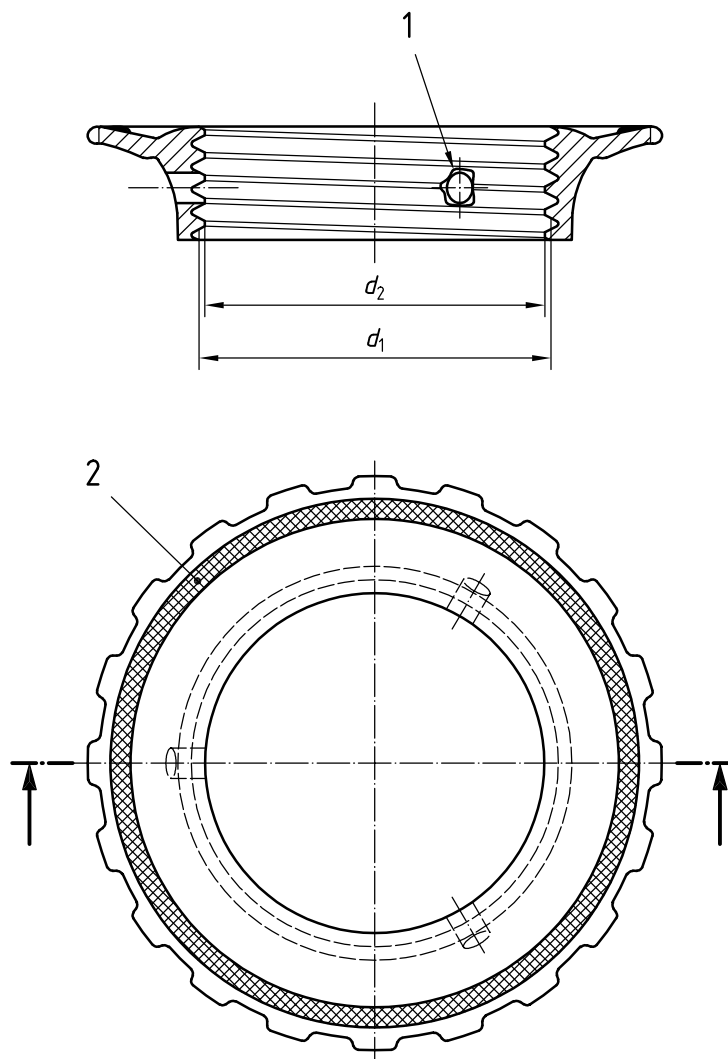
Assembly cross section showing plastics G 2 plug
